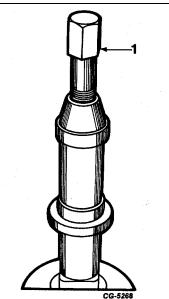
Bushing Remover SE-1955-5 Installed in Lower Bushing 1. Remover
